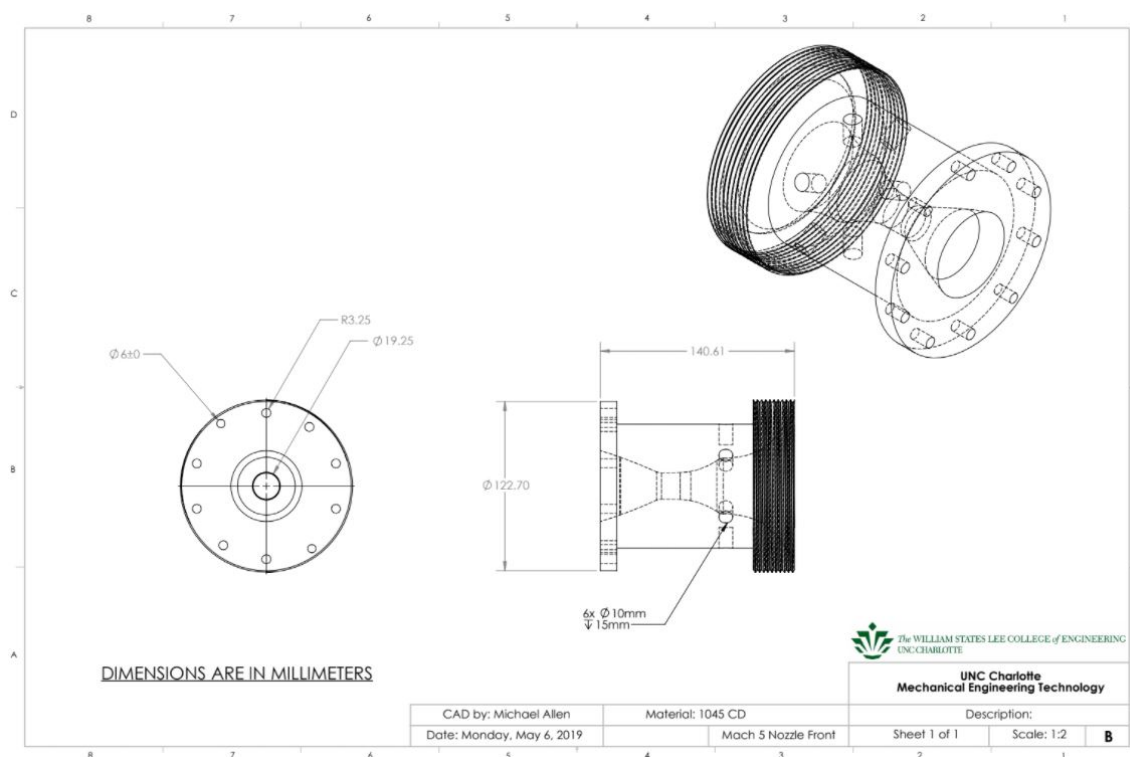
Drawing of the UNCC HSWT Mach 5 nozzle outlet.
